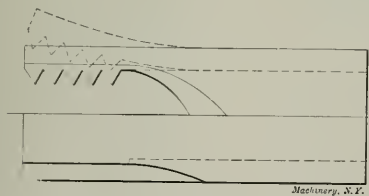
Effect of Improper Hardening of Spring Screw Threading Die.
